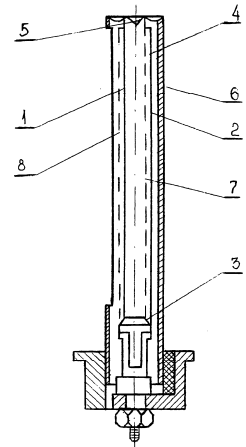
1 – inner tube; 2 – outer tube; 3 – choke; 4 – ring; 5 – cone-shaped plug; 6 – heat shield; 7, 8 – effusive holes
